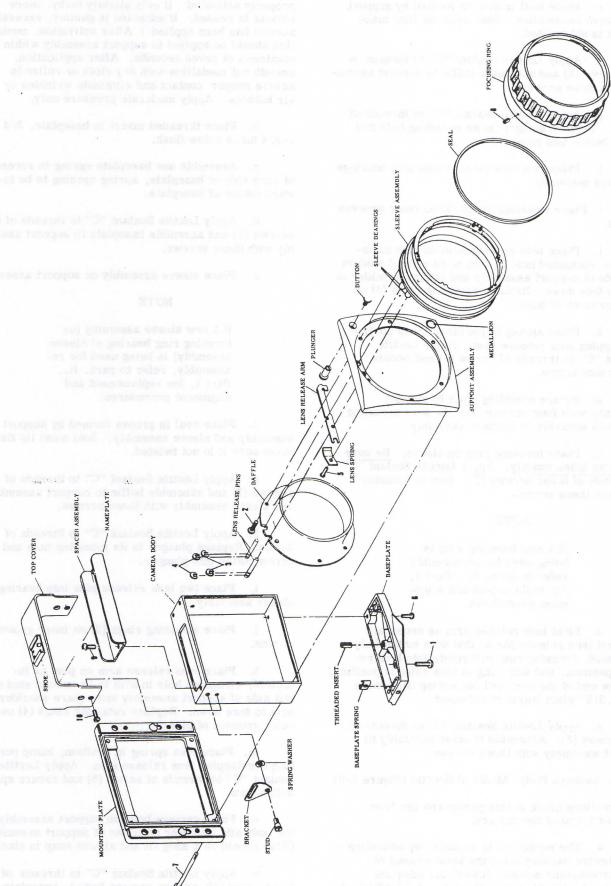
MODEL XI SPECIAL CAMERA BODY REASSEMBLY
